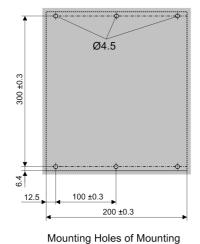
Dimensions of Resistor Unit 7XR6004-0CA00 for Panel Flush or Cubicle Mounting
